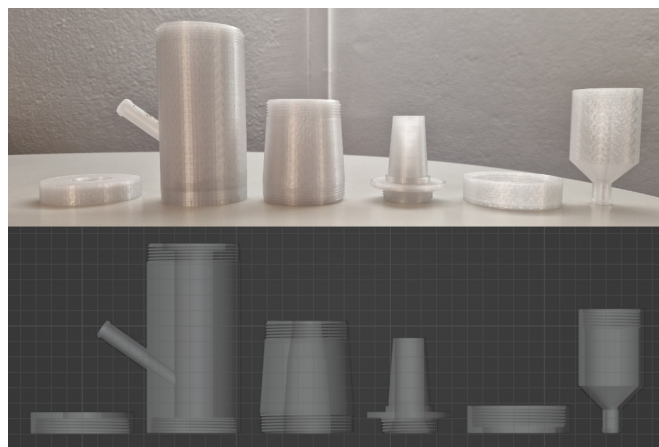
The final 3D-print of the valve holder section and compliance chamber (top) based on CAD designs (bottom).
